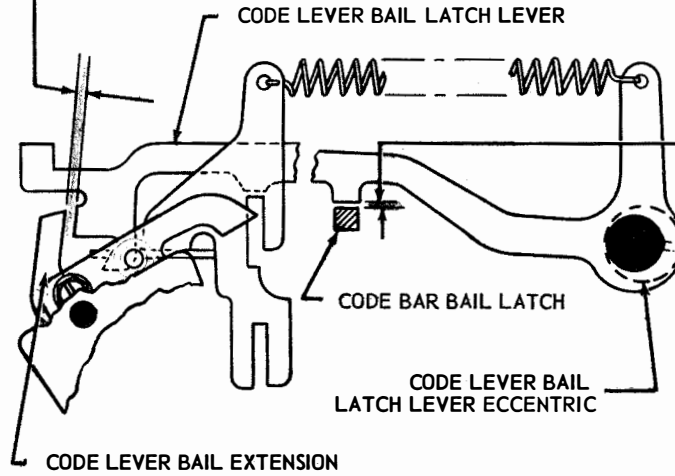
KEYBOARD CODE LEVER BAIL LATCH MECHANISM, LEFT SIDE VIEW
